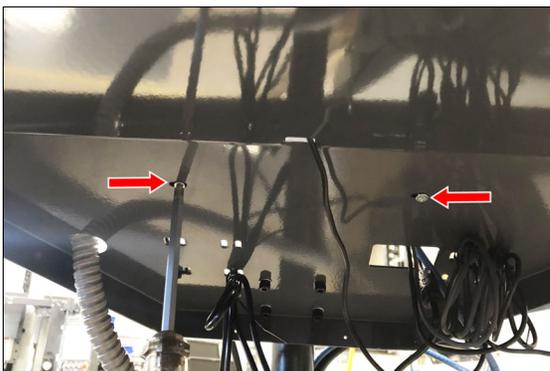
Attaching the keyboard tray to the operator console (from below).
